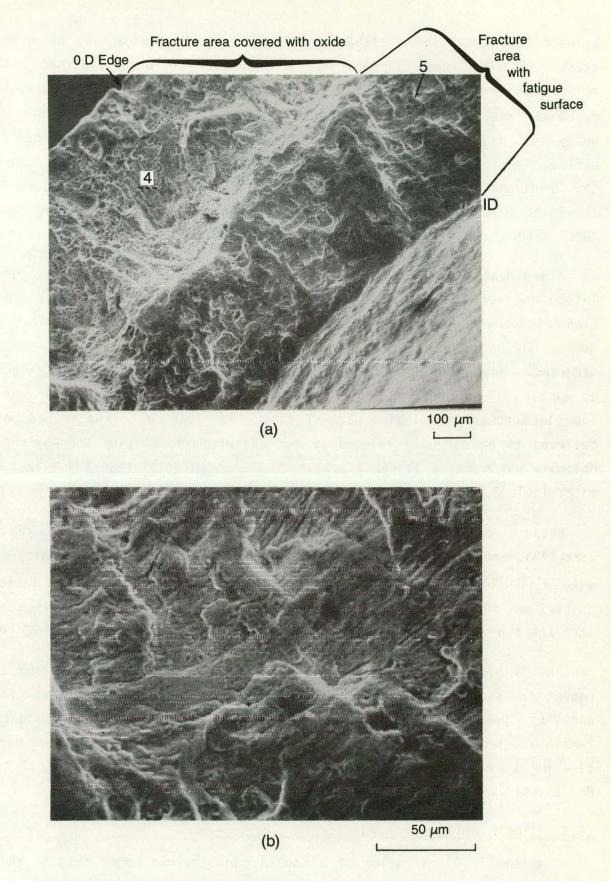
Fracture Surface of 310SS Tubing a) Corrosion Towards OD and Fatigue ID b) High Magnification of Fatigue Striations
